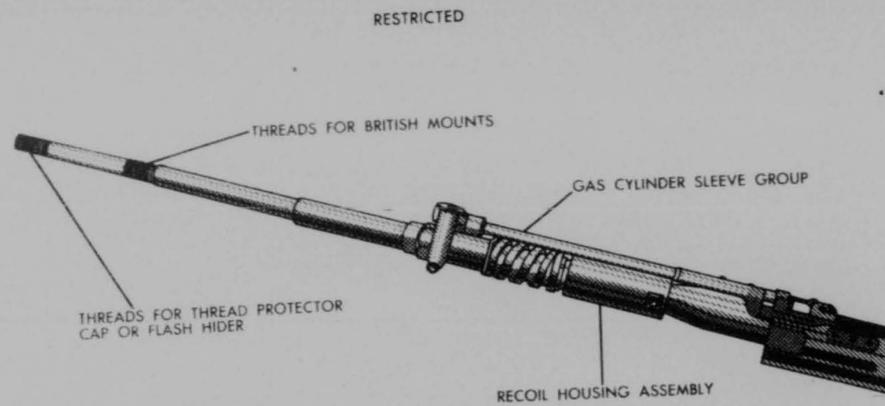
Gun Tube Showing Components Mounted on Tube—Close-Up View.
